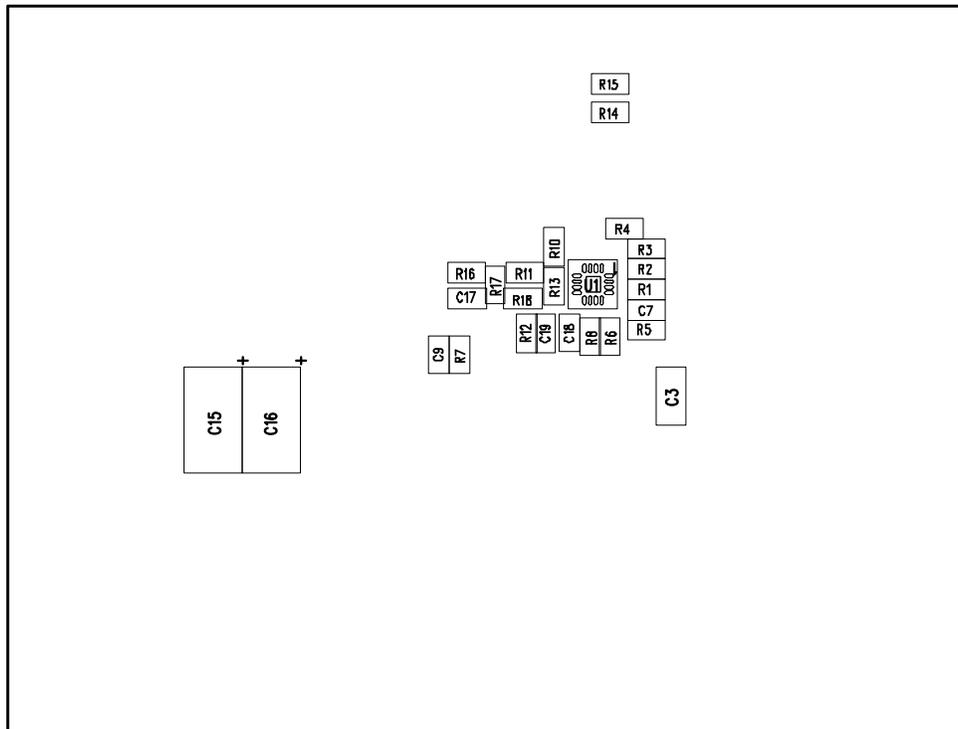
TPS53819AEM-123 Bottom Layer Assembly Drawing (Bottom View)
